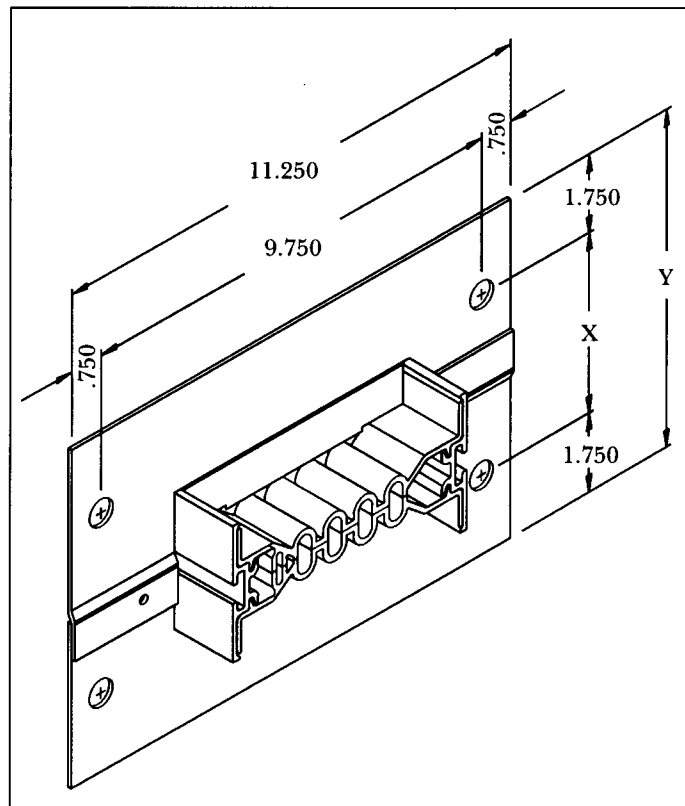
Floor/Wall Flange Cutout and Drilling Detail
